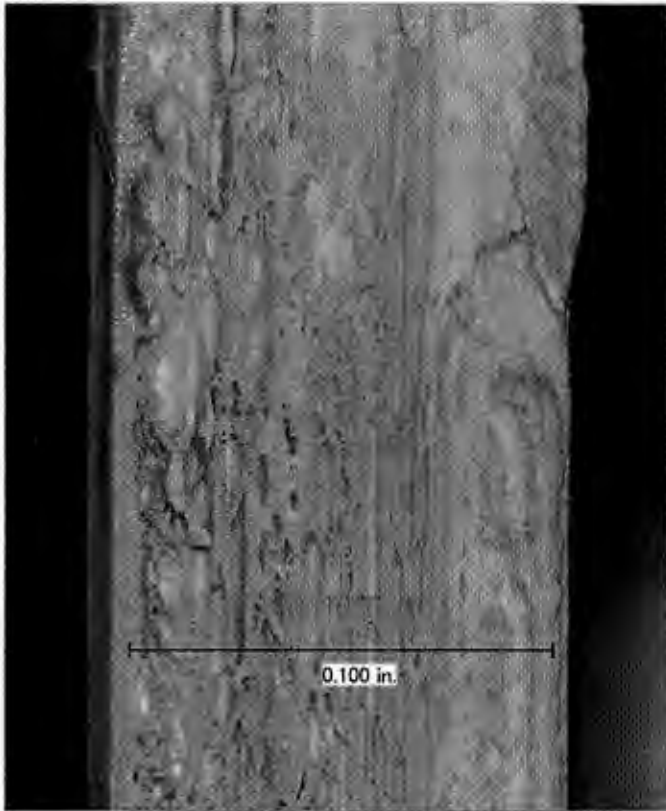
A fracture surface of the pipe section shown in Figure 9.
